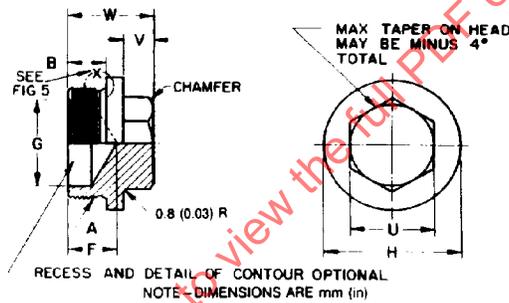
HEXAGON OUTSIDE HEAD PLUG (420109A)
